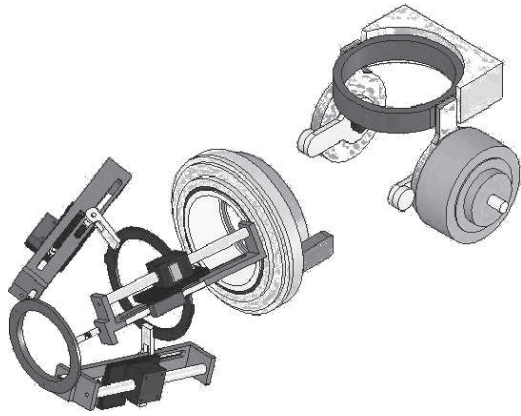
EXPLODED VIEW OF EXOSKELETON ASSEMBLY
